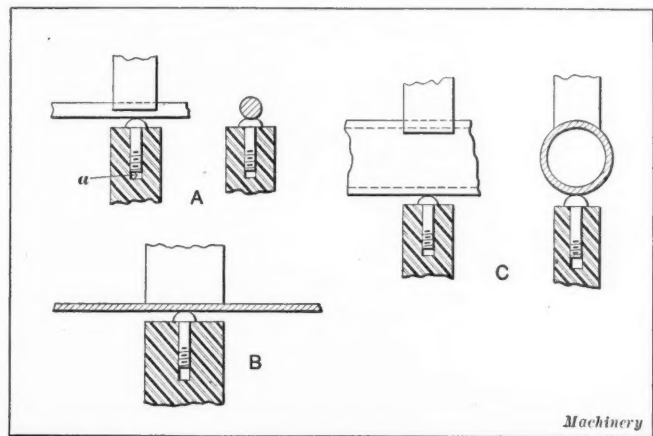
Diagram illustrating Processes of welding Screws to Sheet Tubing, etc.
